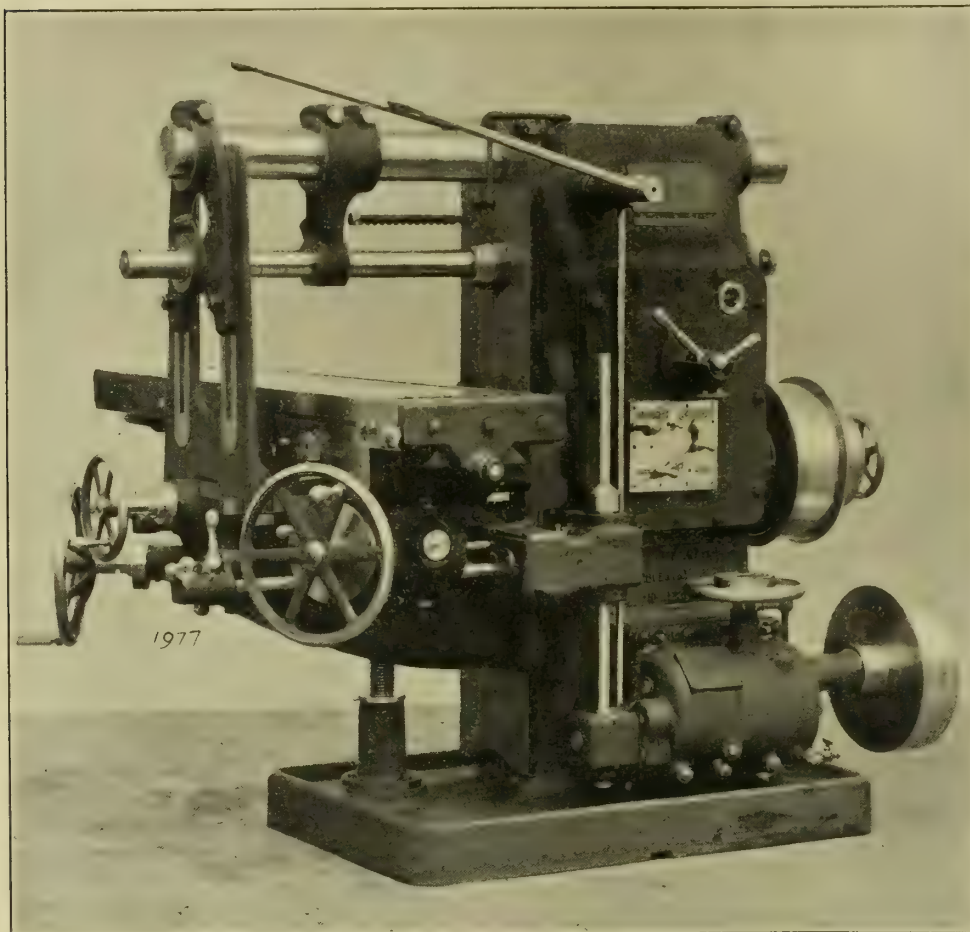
No. 22 SINGLE PULLEY HORIZONTAL MILLING MACHINE. MESSRS. ALFRED HERBERT, LTD., COVENTRY.
